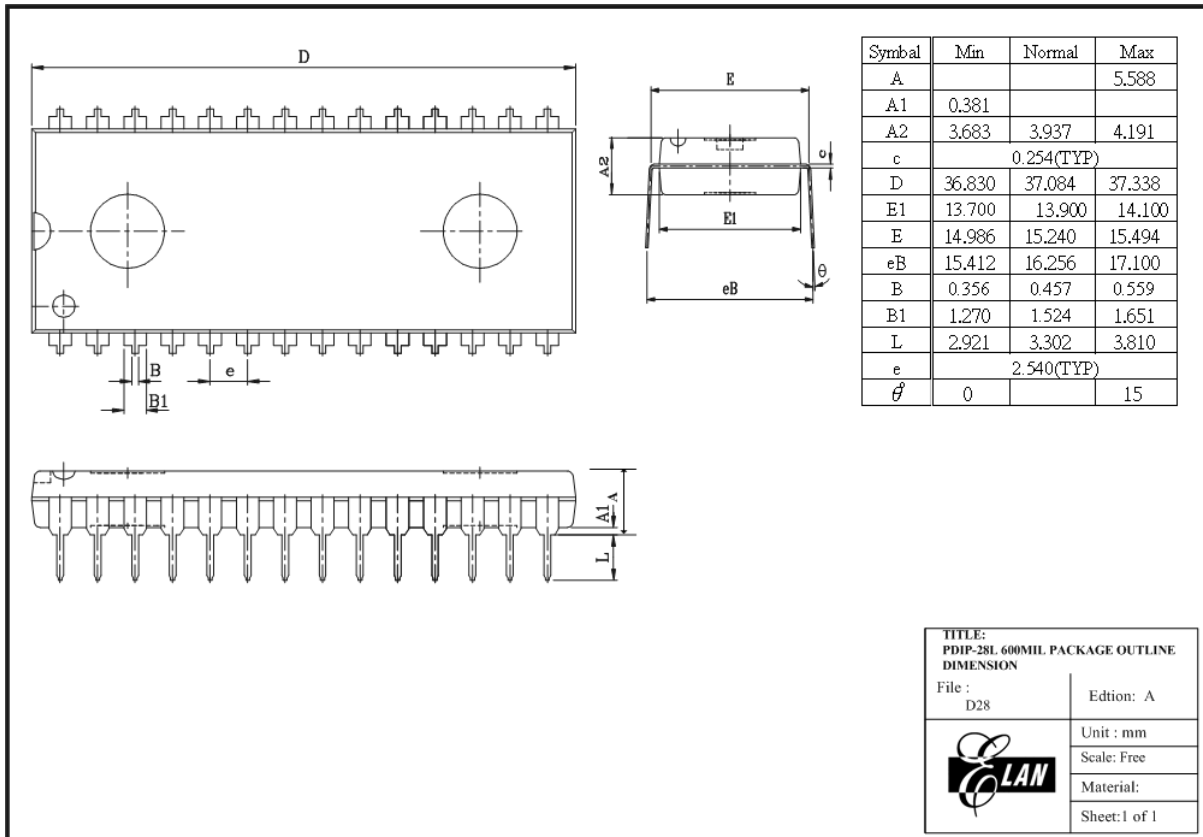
EM78P224N 28-Pin PDIP Package Type
